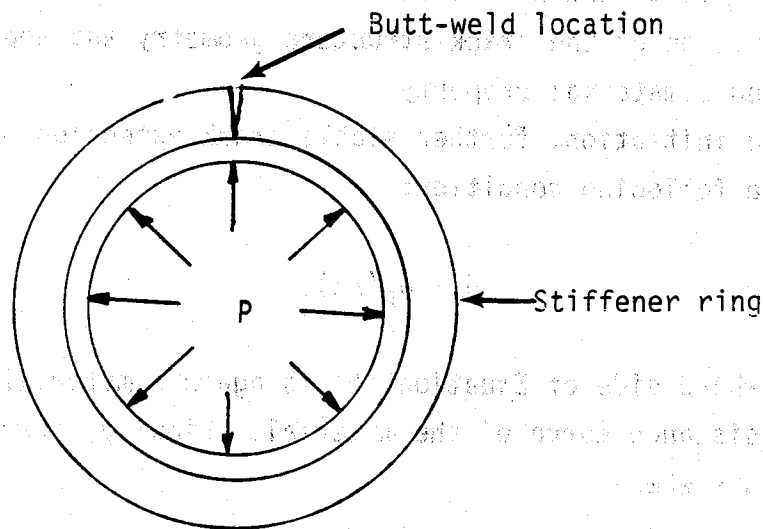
POSTULATED CONDITION OF CONTAINER WITH CRACK THROUGH THE STIFFENER RING BUTT WELD AT INTERNAL PRESSURES GREATER THAN 500 psi
